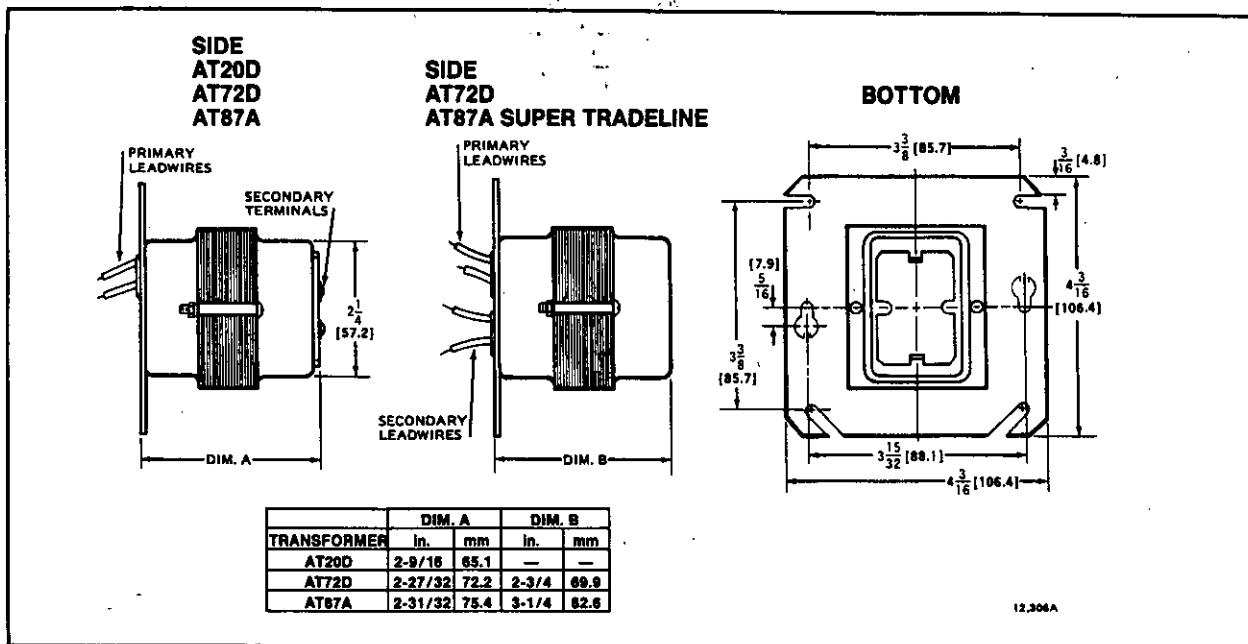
AT20D, AT72D, AT87A DIMENSIONS IN in. [mm IN BRACKETS] WITH 4x4 in. MOUNTING PLATE.
